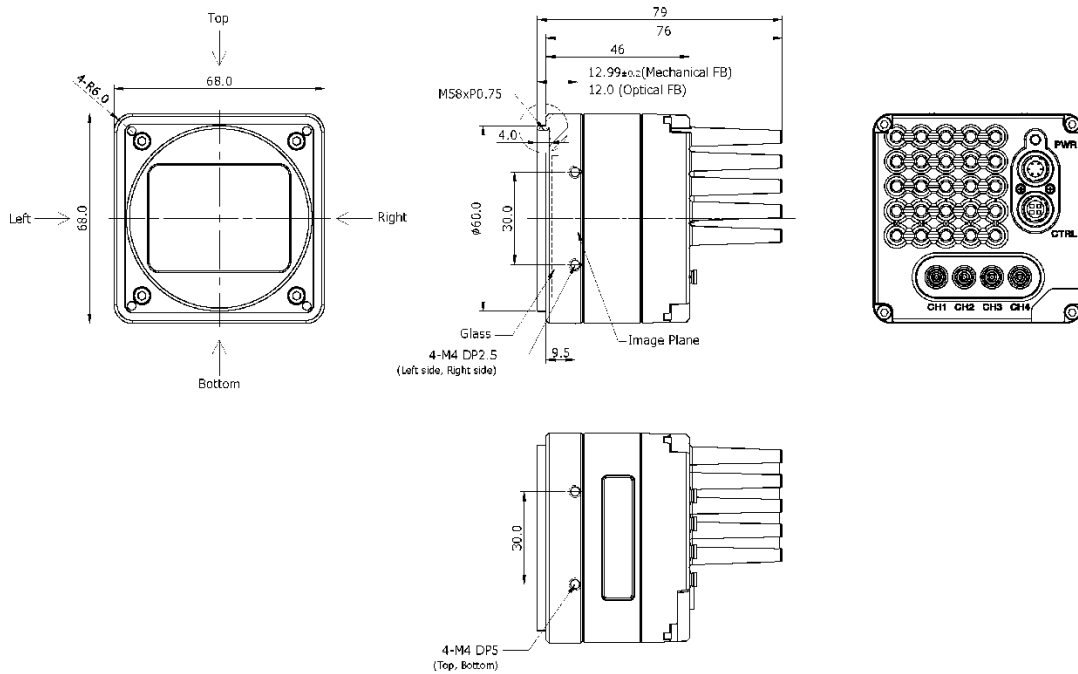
Mechanical Dimension of the VC-51MX2 Heatsink model
